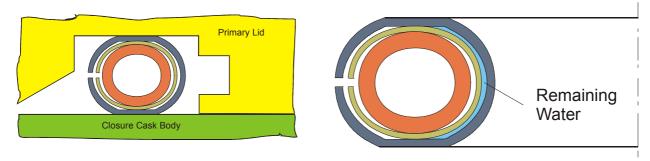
Location of the seal in a dual-purpose CASTOR[®] cask (right), remaining water in the seal after final pressing of the seal before drying procedure (left)
